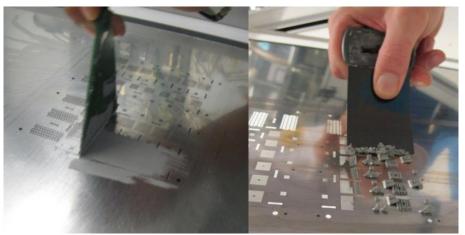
Filling of small apertures prior to vacuum cleaning test.
